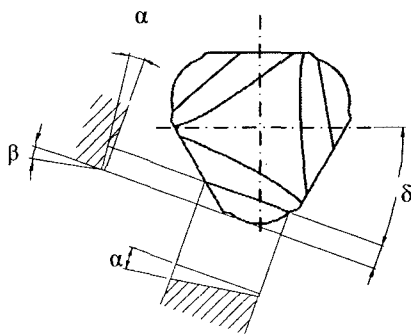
Relief angle(α), rake angle(β) and rotation angle(δ) of the formed tool
